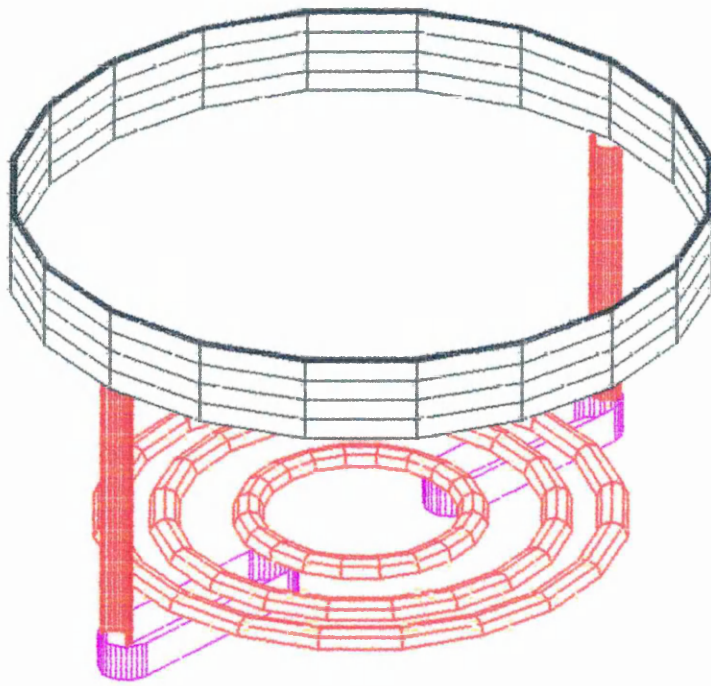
Cooling channels in the cavity of the mould
